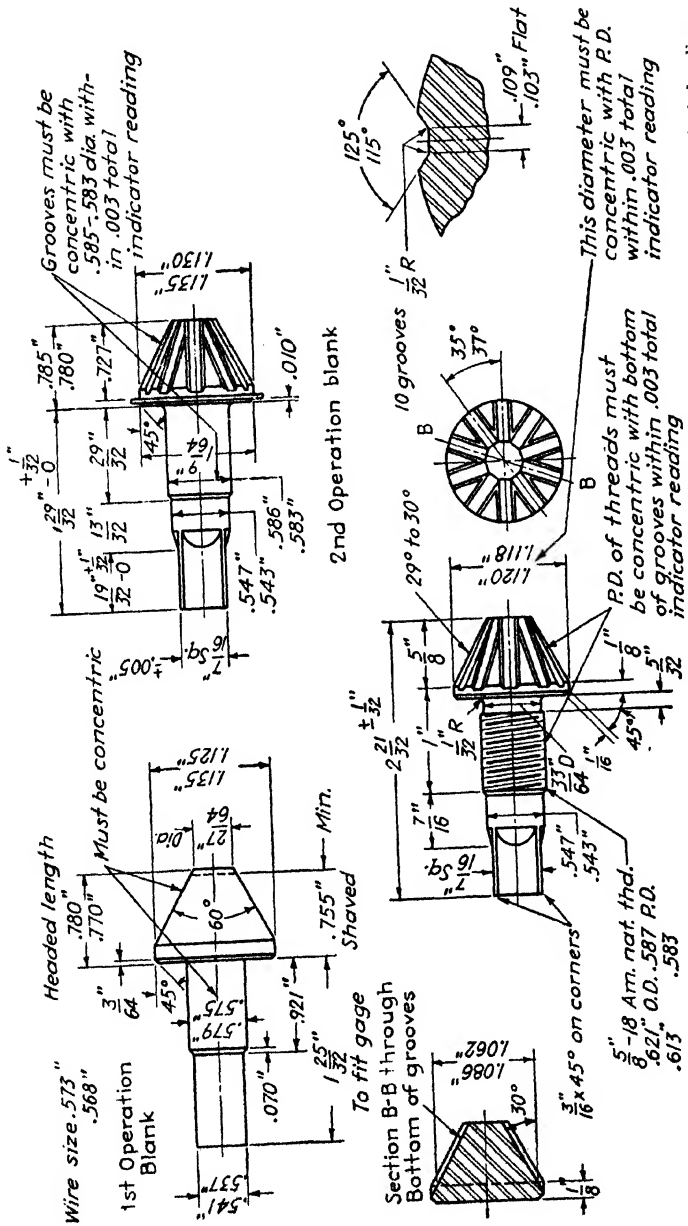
Though unusual in shape, this part is readily cold headed, including the radial grooves in the head. Several of the dimensions are held within close limits. The thread is rolled and outer end of shank is square.
